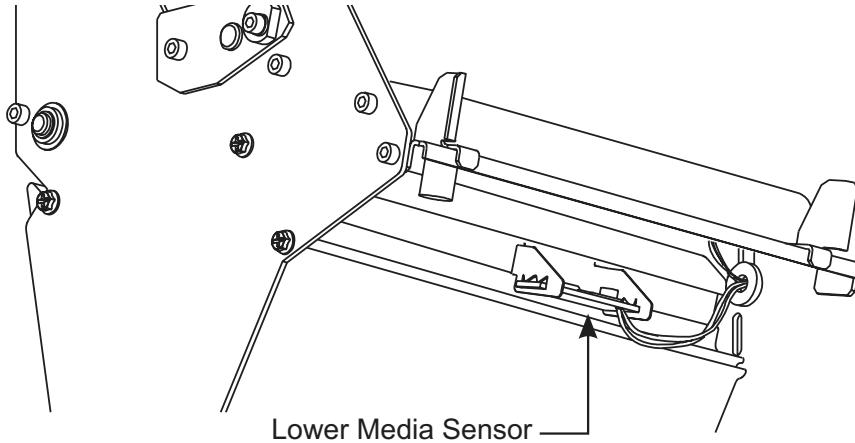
Lower Transmissive Media Sensor Position Adjustment
